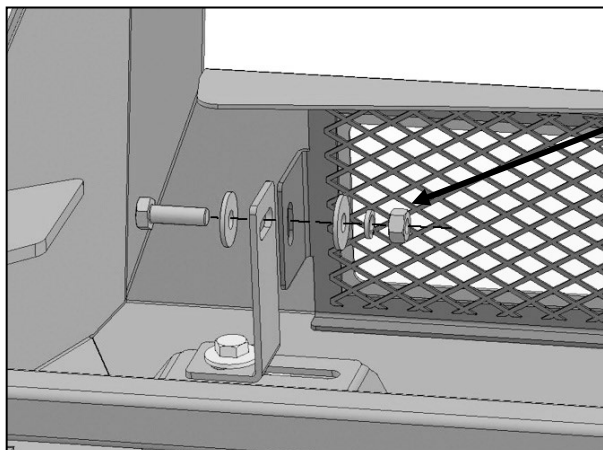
Insert sensor assembly through the sensor mount on back of Bumper
